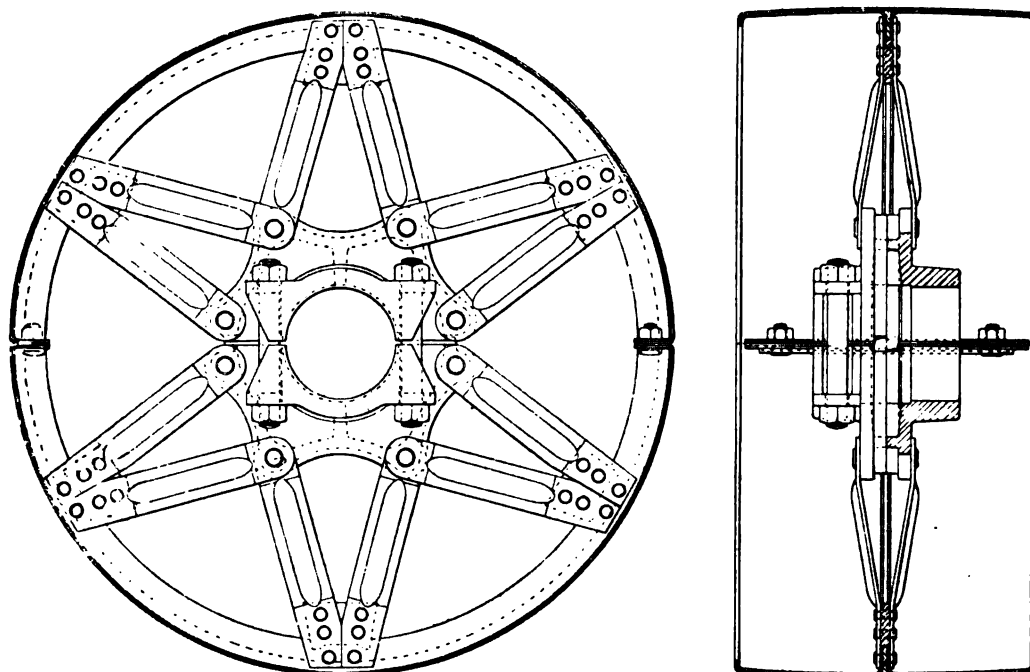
24-Inch Philips' Pressed Steel Pulley with Reinforced Central Rib.
